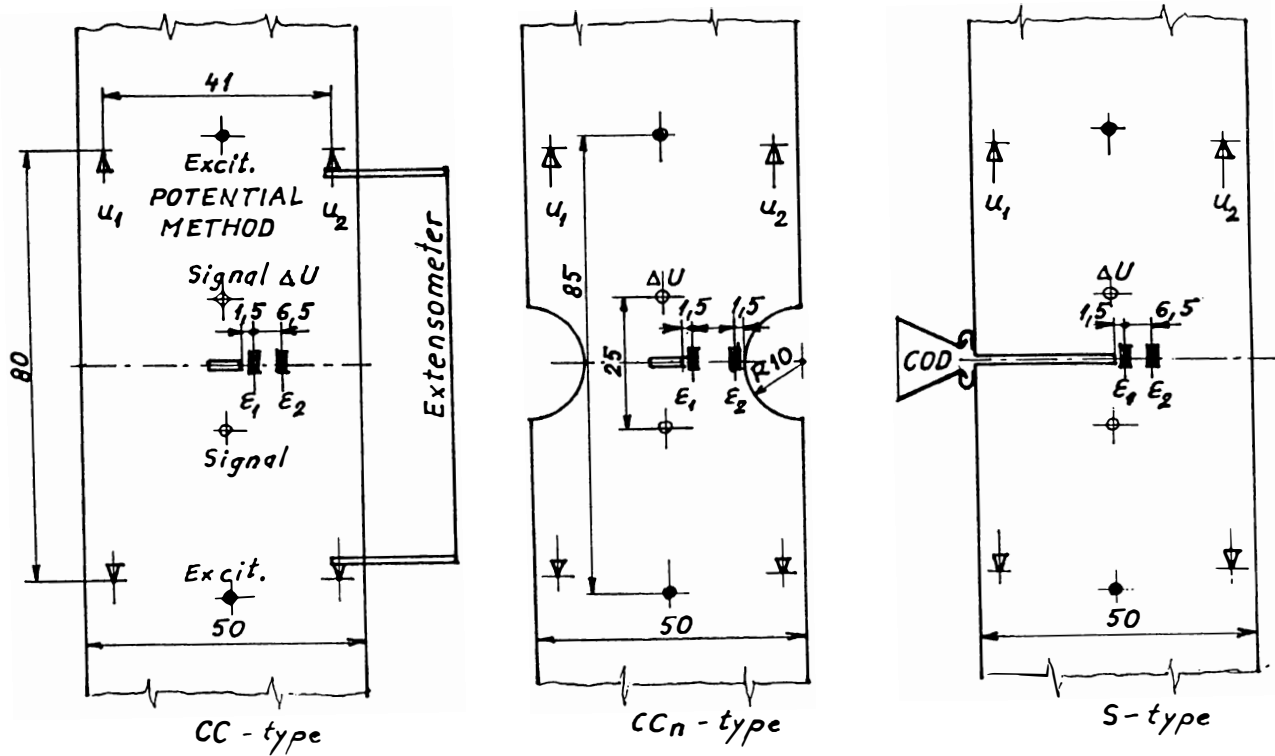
The scheme of specimen types, dimensions and measuring gauges positions
